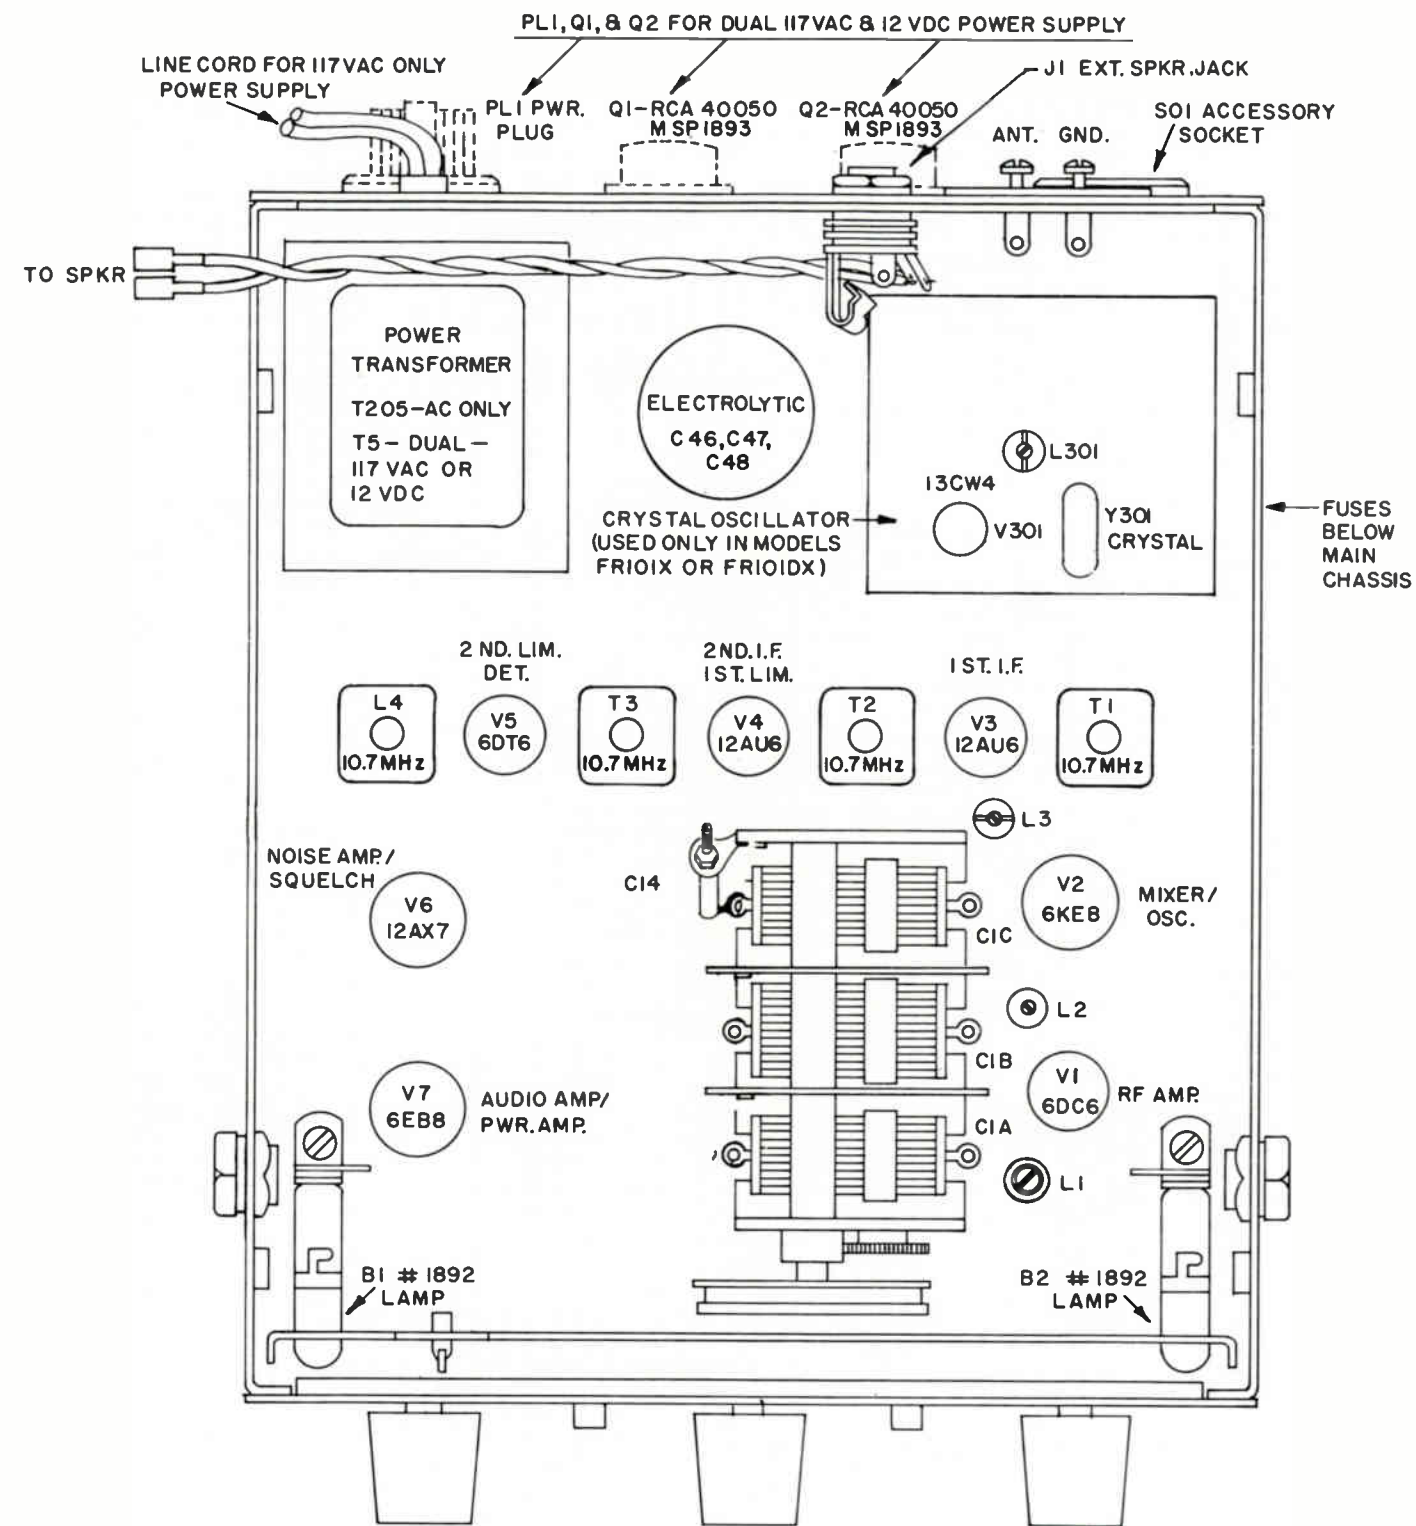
MODEL FR-101 PARTS IDENTIFICATION
